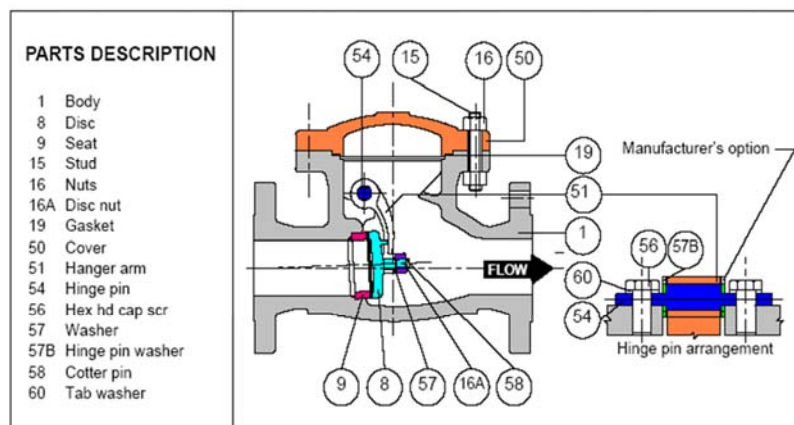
B Swing check valve API 603 stainless bolted cover 14–24" integral seats.
